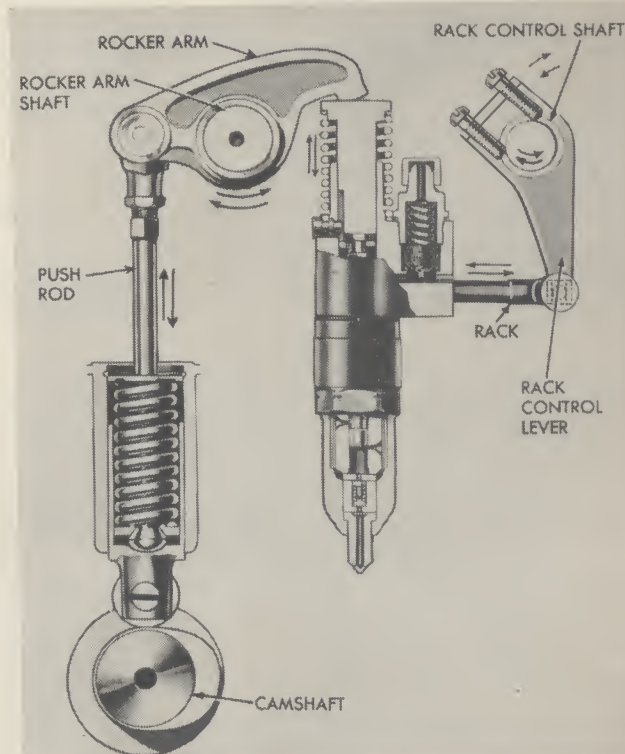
C—GM 3-71 engines used in the Oliver Super 99 tractors are equipped with 70MM high valve unit type injectors.
